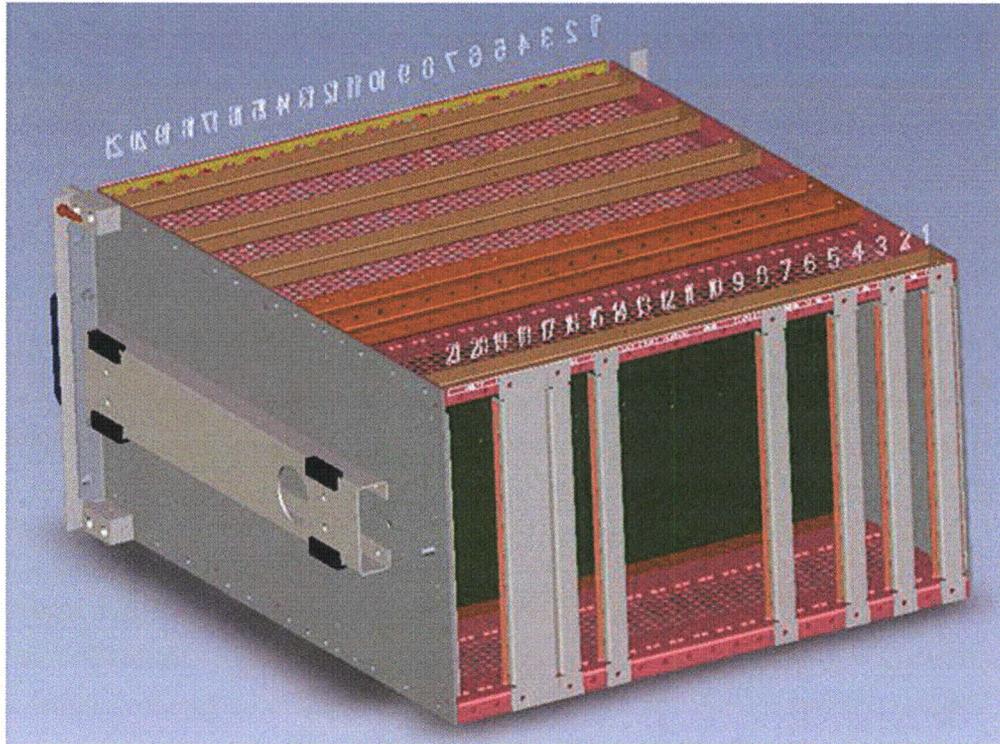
SPINLINE 3* Chassis - Rear view
